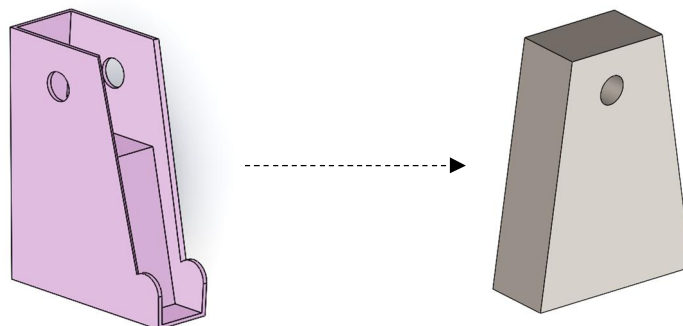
Axle support bracket was changed from complex sheet metal assembly to simple solid design that was later mesh with solid mesh elements.
